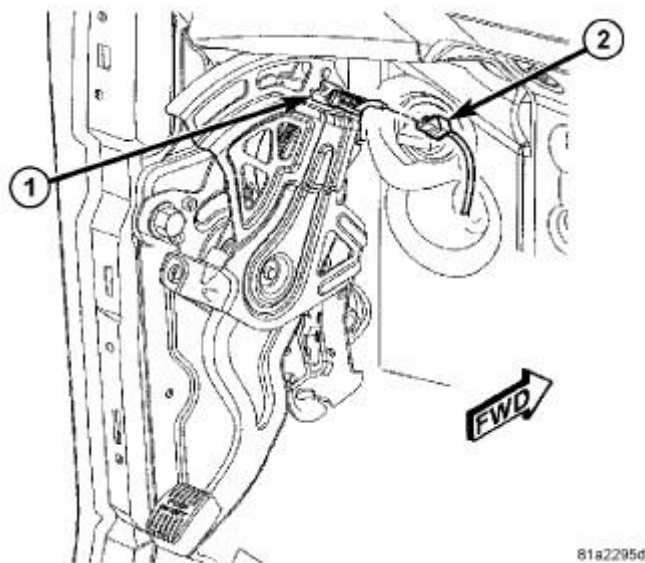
PARKING BRAKE SWITCH CONNECTOR
